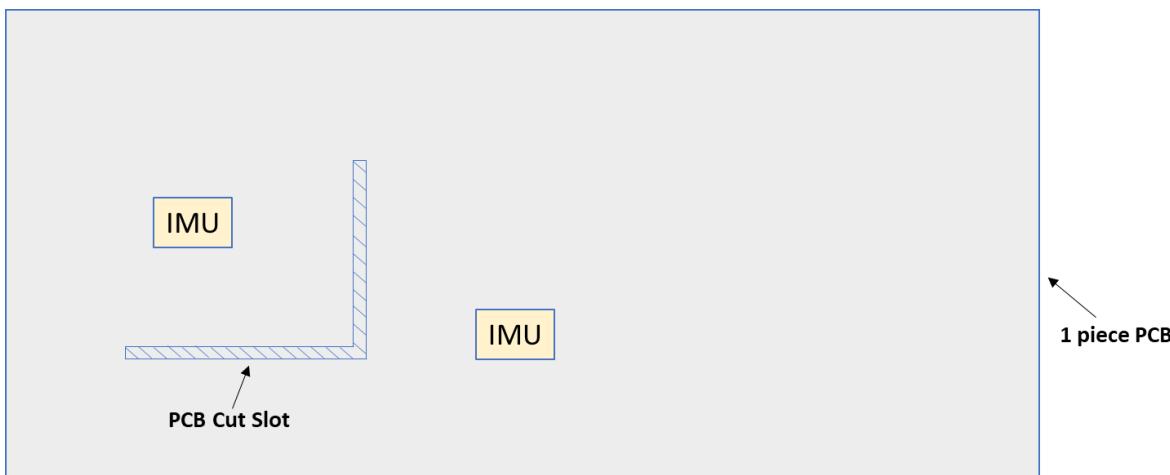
PCB Cut Slot for Multiple IMUs on the same PCB
